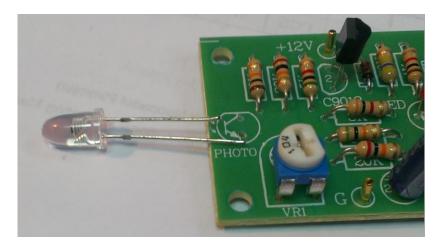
Showing the "longer leg" oriented to the correct mounting hole, prior to assembly.
